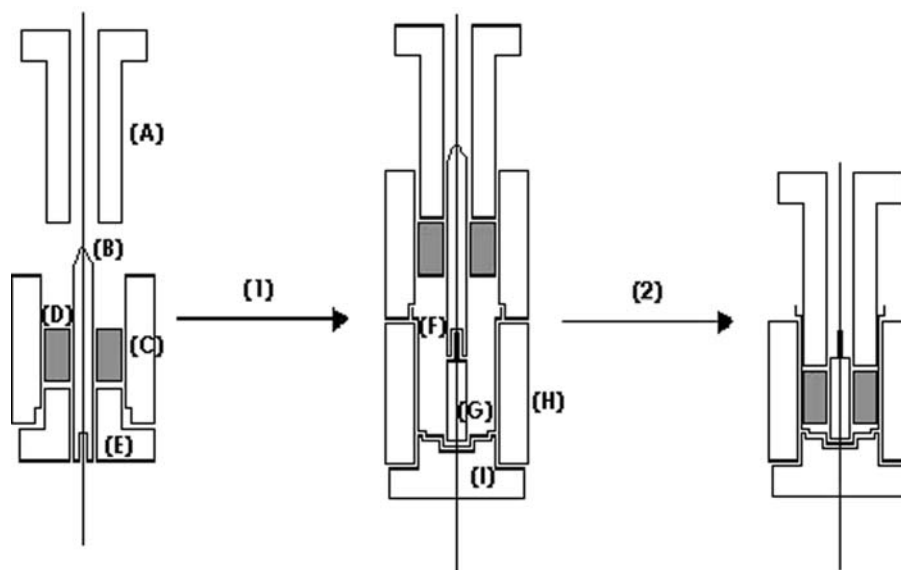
Diagram for the process of making bobbin-type cylindrical cells: (A) punch; (B) rod; (C) collar; (D) cathode pellet; (E) base; (F) step-can; (G) guide with stud; (H) lower collar; (I) cap.
